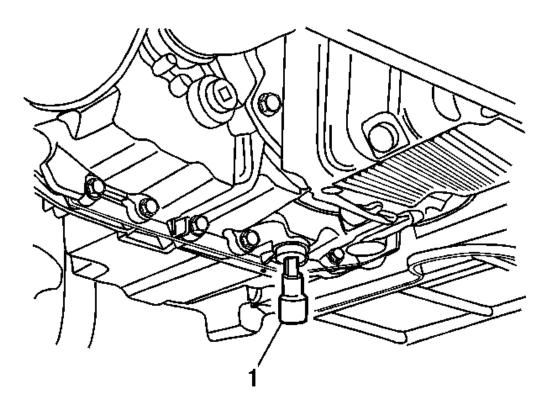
View Of Transfer Case Vent Tube Hose Courtesy of GENERAL MOTORS CORP.
